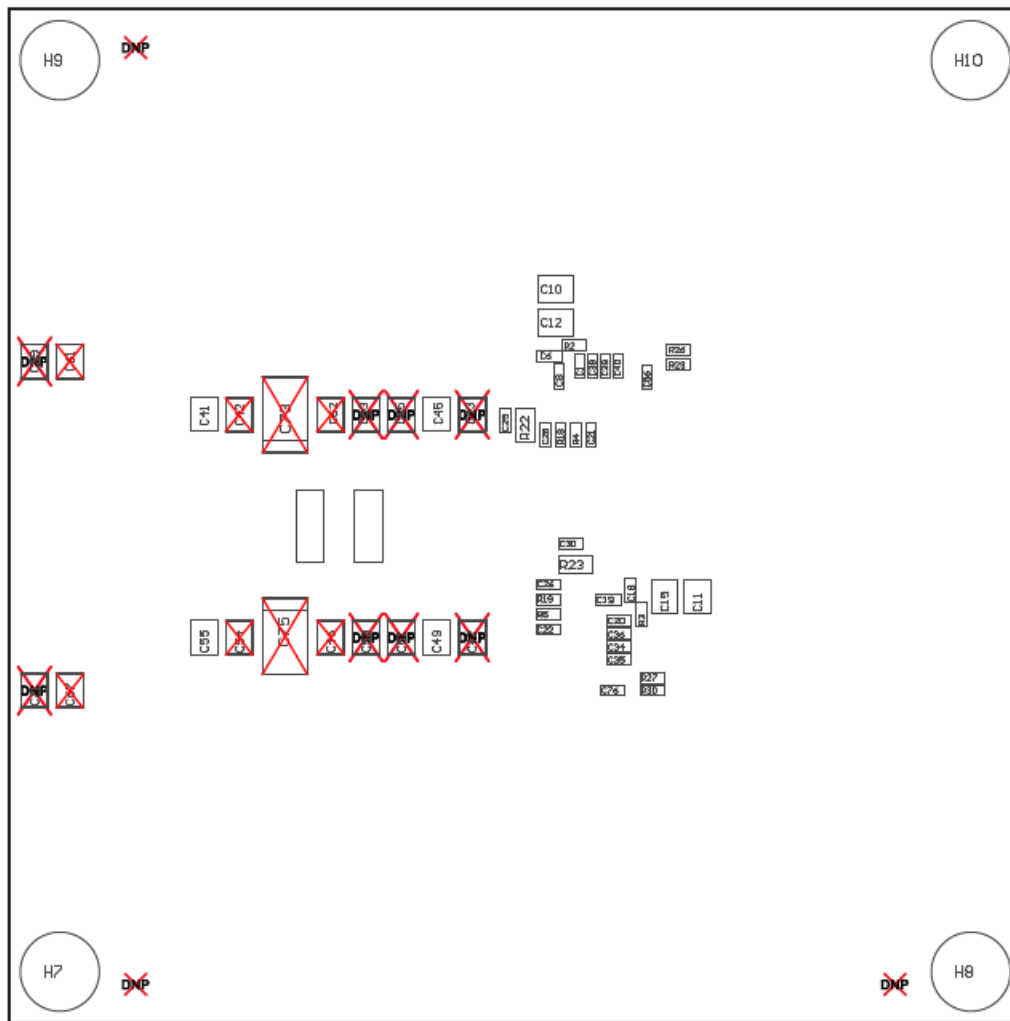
TPS546C23EVM2-746 EVM Bottom Assembly Drawing (Bottom View)
